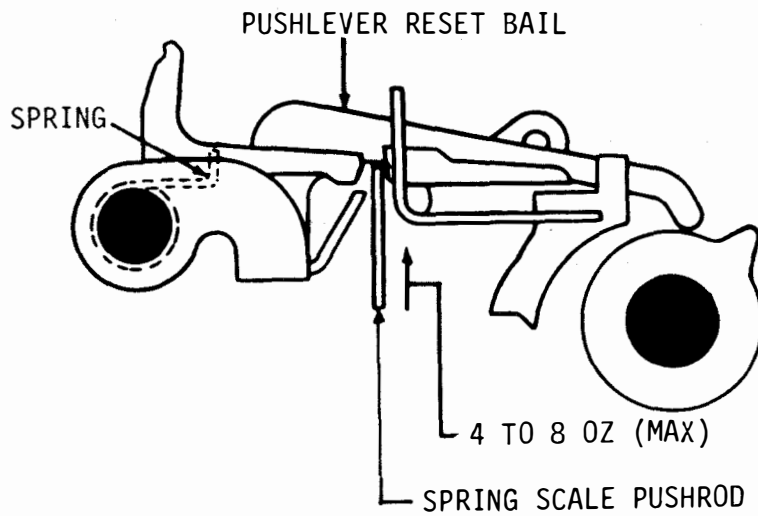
Pushlever Reset Bail Spring, Right Side View
